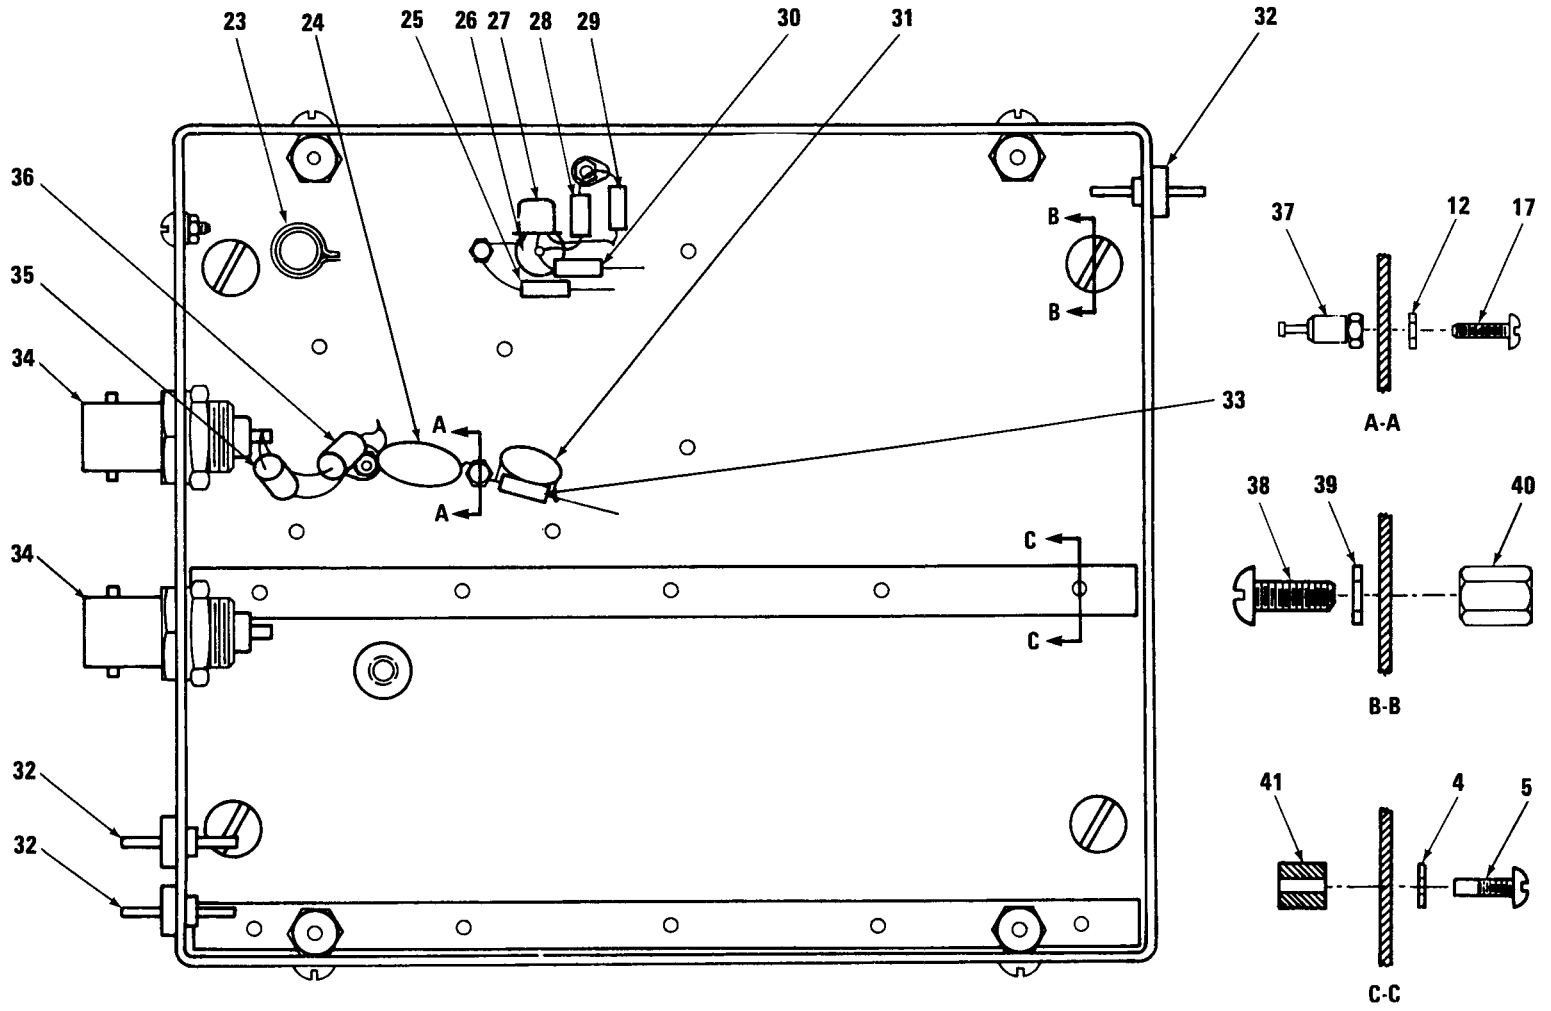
VHF Subassembly (Sheet 2 of 2)
